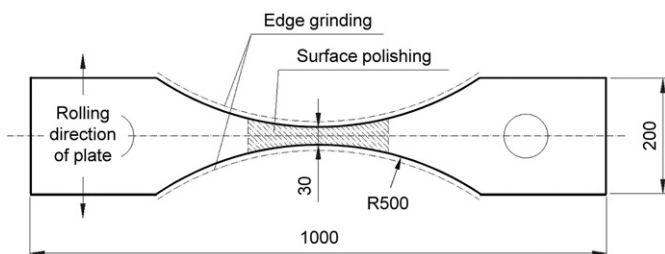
The dimensions of the dog-bone specimen in millimetres.
